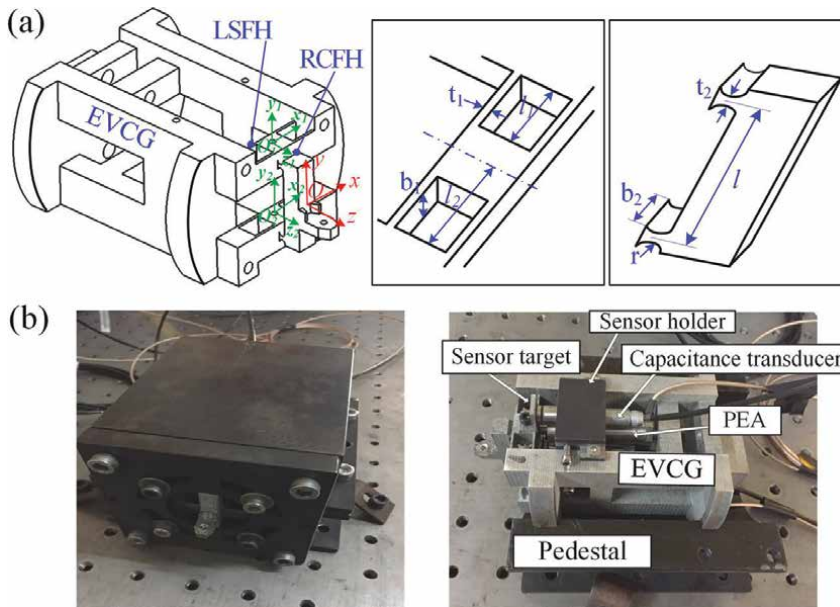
Illustration of the improved EVC device. (a) The compliant mechanism. (b) The prototype [9].
